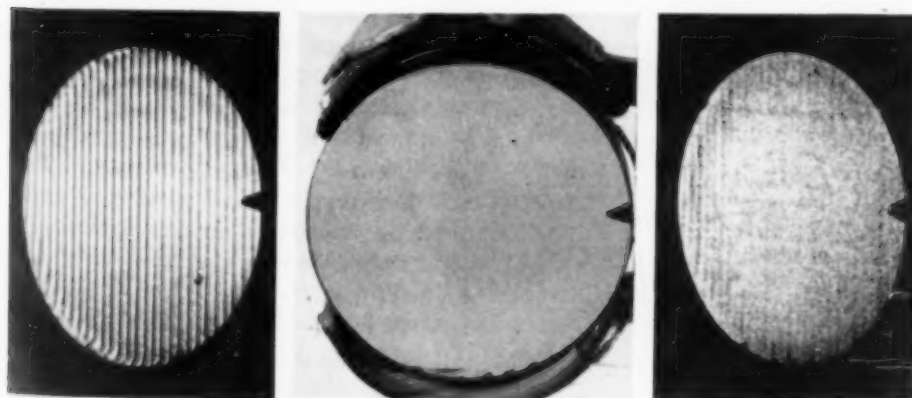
Views Showing Deep Seated Disturbance by Rough Machining. Left: Bar end after rough machining on shaper. Center: Same after carburizing, grinding smooth and lapping — all in a direction perpendicular to machining. Right — Shot-blasted surface shows traces of both the machining and the grinding marks
